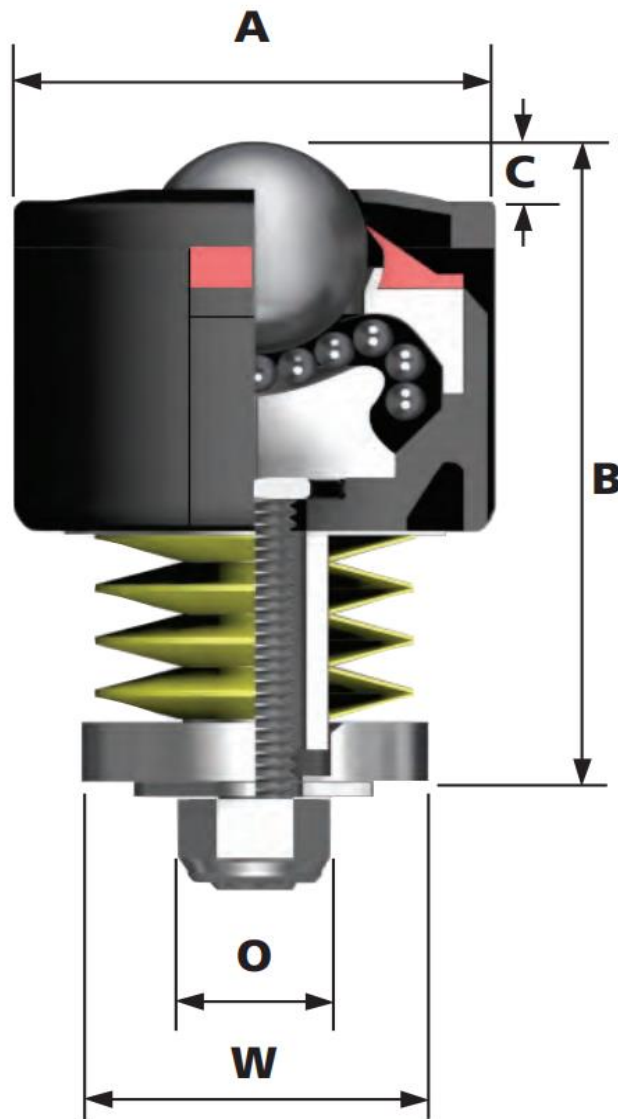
Stainless Steel Spring Double Seal BTU
